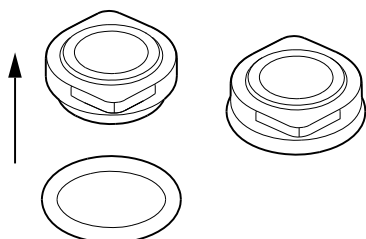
Fitting the O-ring on the stationary shaft seal part
